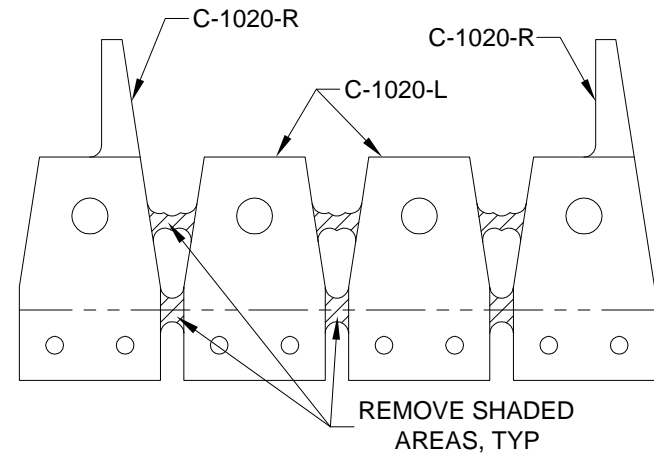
CUT APART LATCH ATTACH ANGLE
